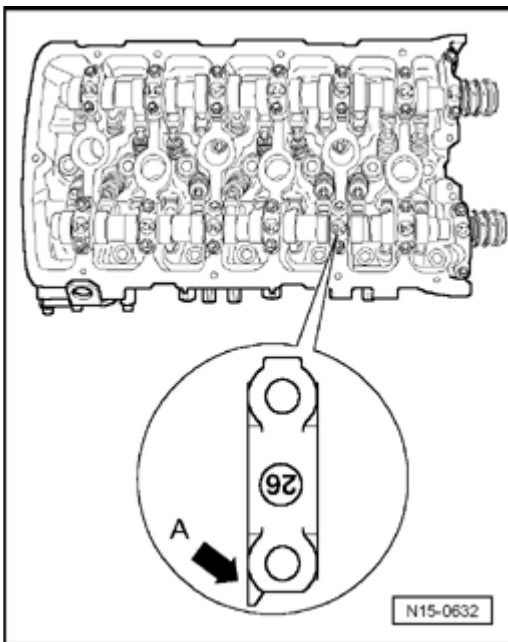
Installation Position Camshaft Bearing Caps, Bank 2
